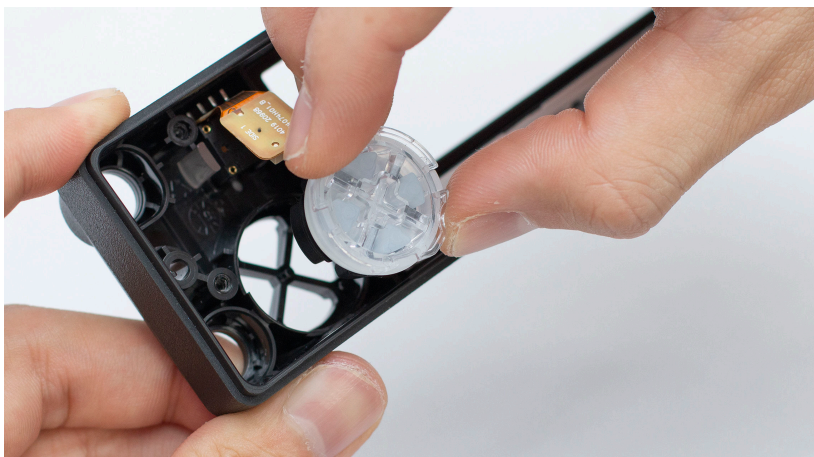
Emergency Button [20] and Emergency Button Retainer [21]
